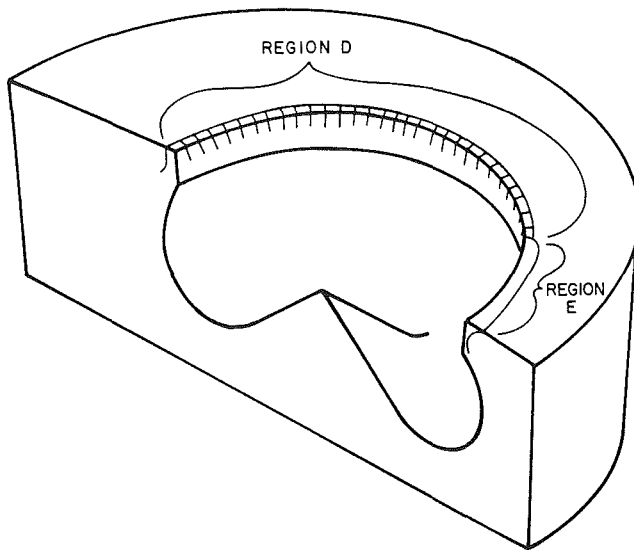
Compressive stress cracks in the PSZ piston bowl insert
